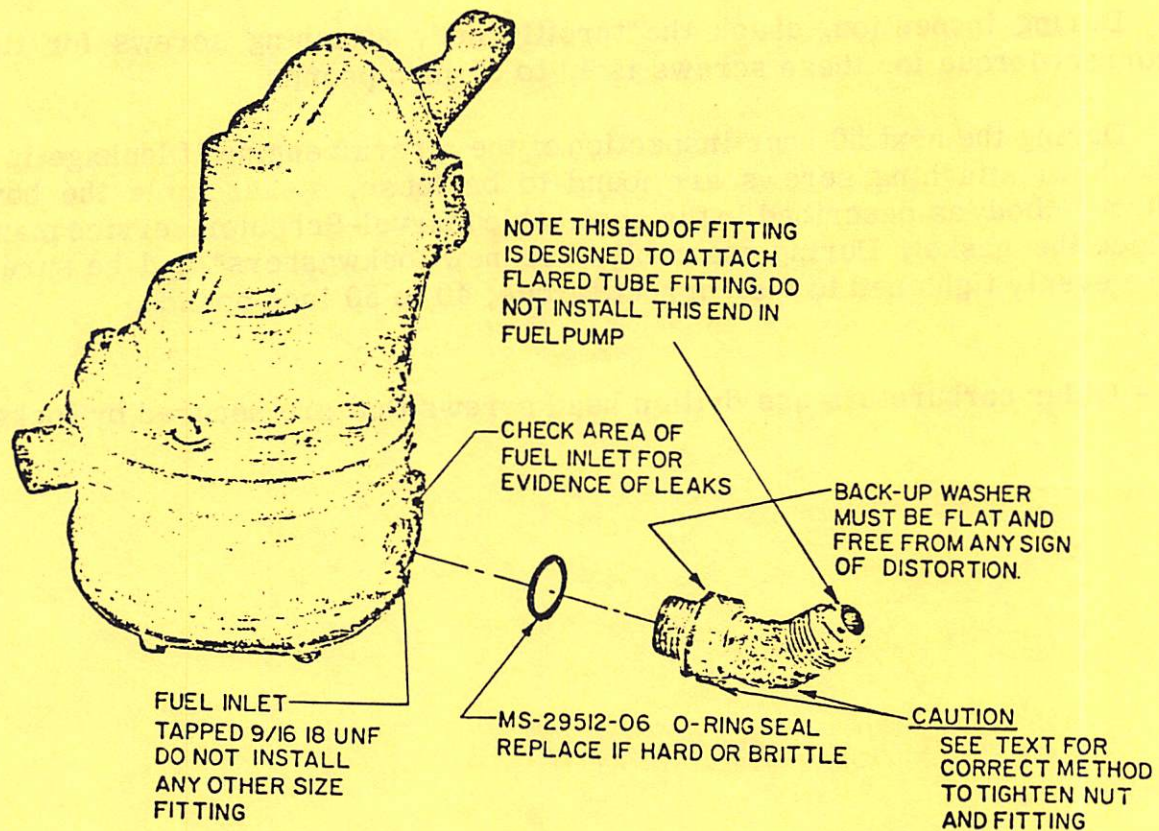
Diaphragm Fuel Pump Showing Inlet Boss, Seal and Fitting
